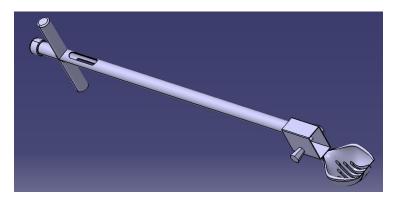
Main Outer Tube Assembly. This assembly comprises the total length of the DRTFLOSS
